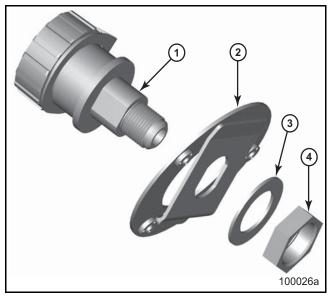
Fuel Fill Valve, Mounting Bracket, Washer and Nut
